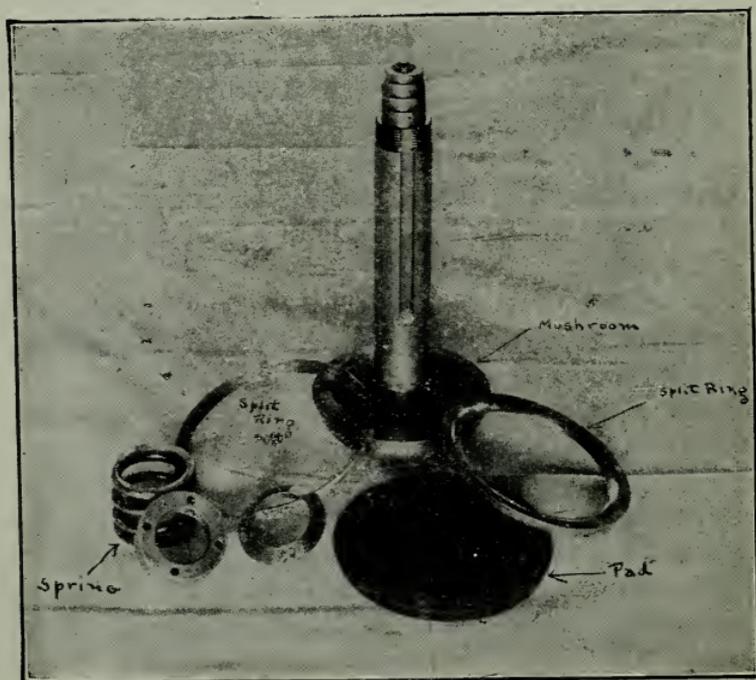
Mushroom, rings, pad, spring, and nut.
